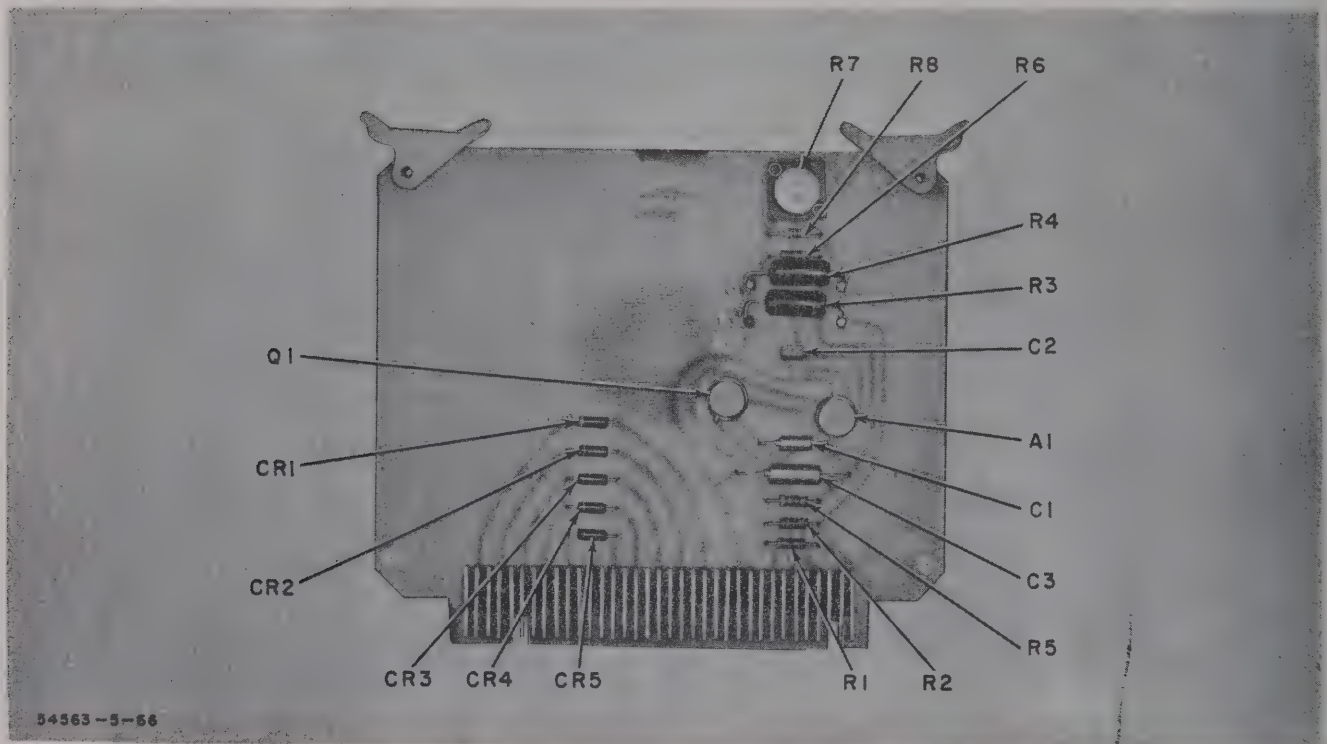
+12-Volt Regulator Printed Wiring Board A1, ECI 61-00967-001, Part Location
